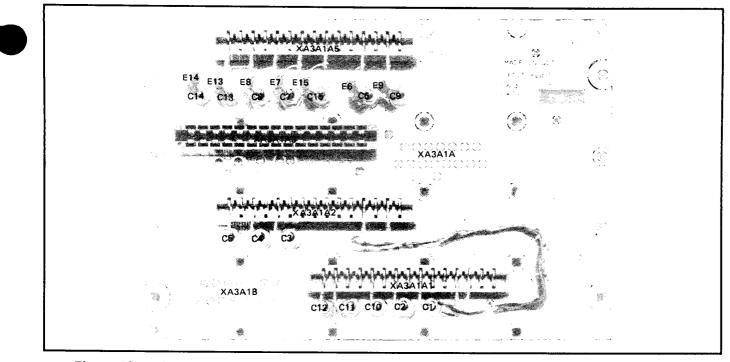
A3A16 Reference and M/N Motherboard Assembly Component Locations (Top View)
